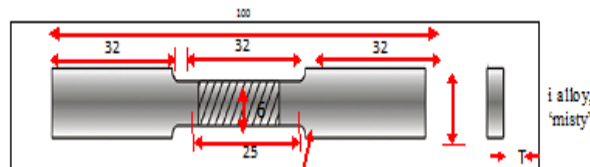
ASTM sub-size sample for tensile test (dimensions are in mm)
